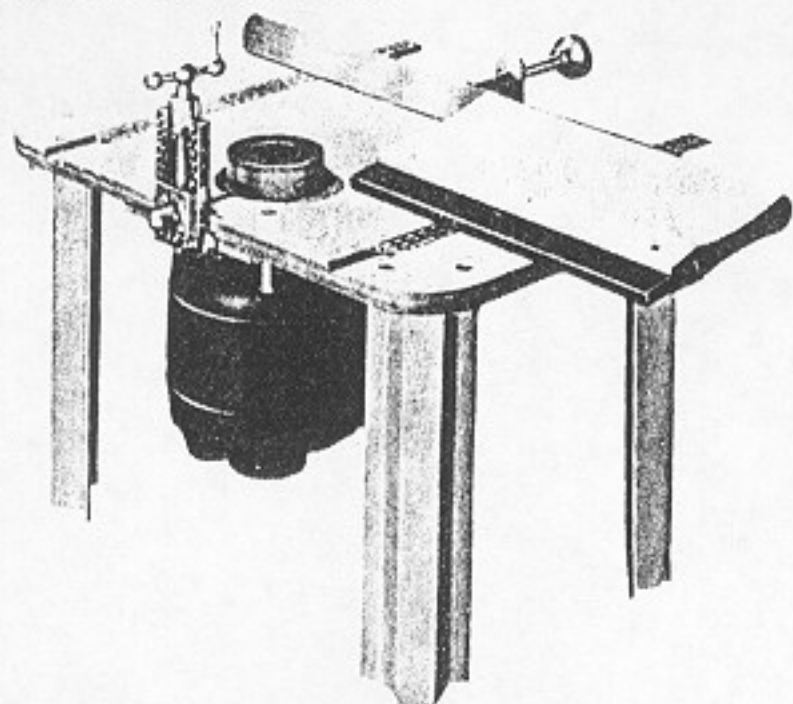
So highly specialized has the industry become that this machine is used solely for sharpening the edges of rubber-bladed squeegees. In plants where hundreds of prints are produced each day, the problem of keeping keen edges on the squeegee blades becomes a serious one.
